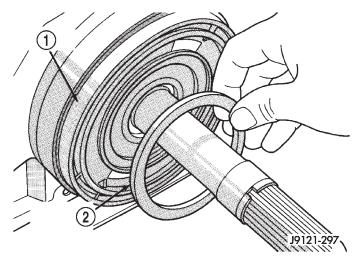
Overdrive Piston Thrust Plate Removal/ Installation
